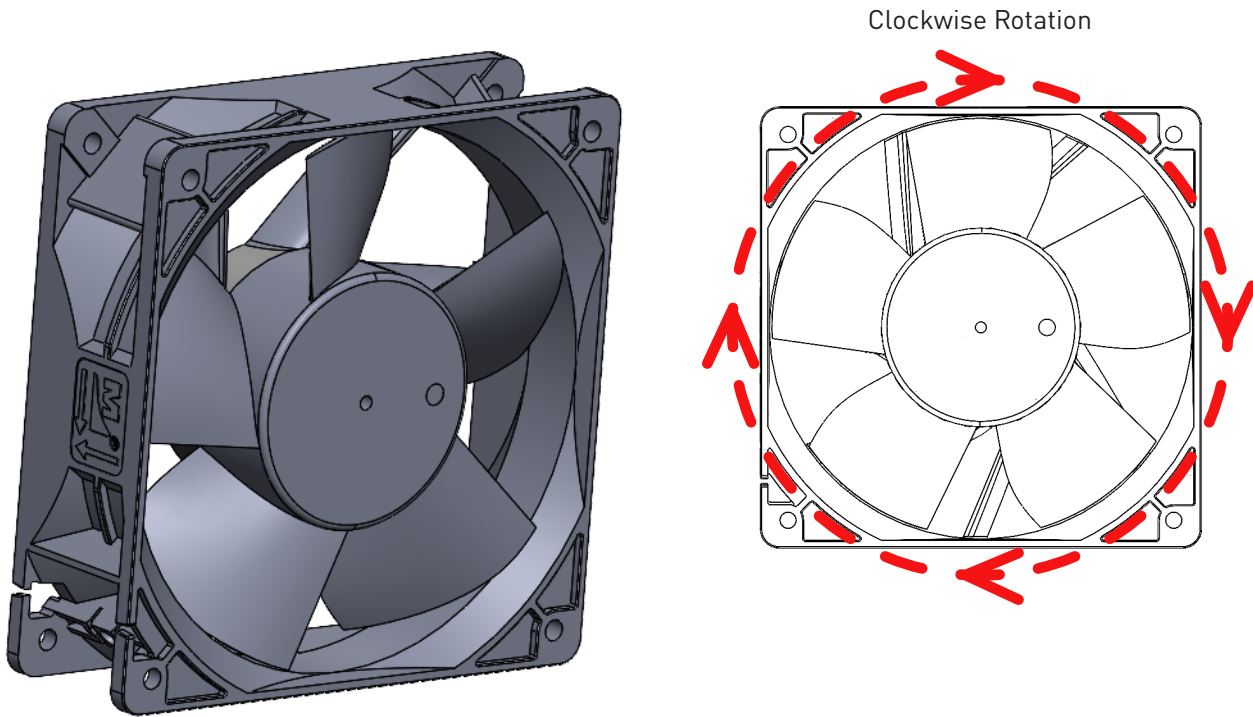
B.11.3 EC Axial Evaporator 5 blade Motor
